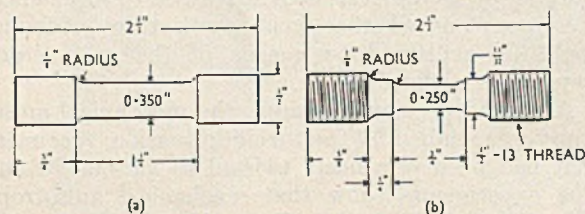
Dimensions of the (a) Torsion and (b) Tension Test-Specimen.
